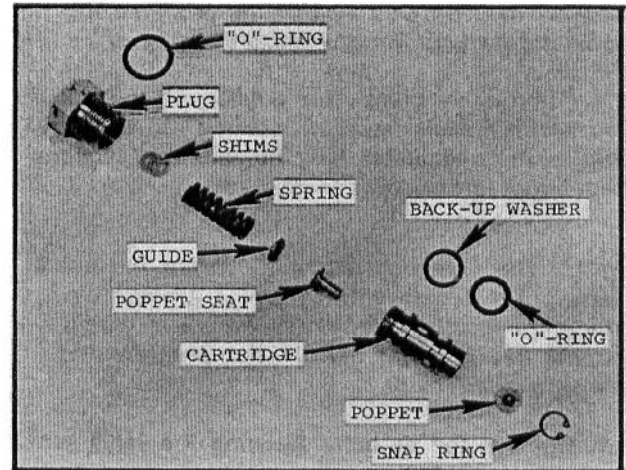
Disassembled "32042" Circuit Relief Valve
